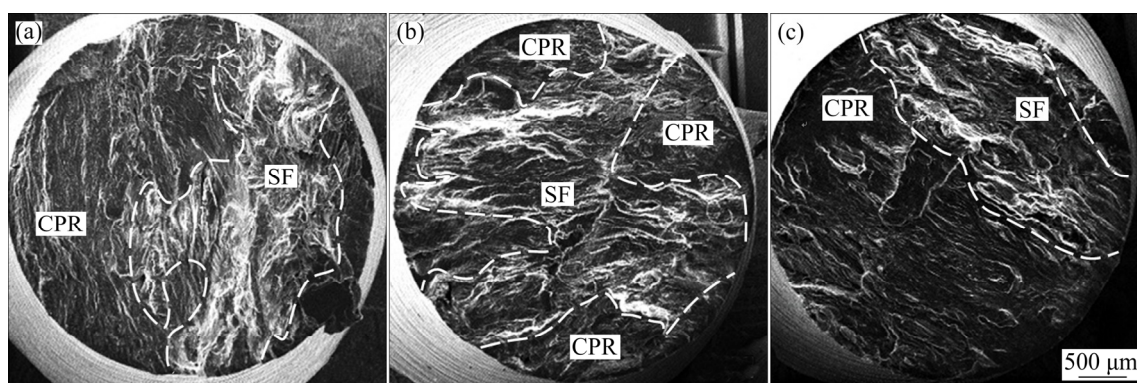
Macroscopic views of fatigue fracture surfaces of forged samples at stress amplitude of 30 MPa: (a) AZ31B-LAS; (b) Composite-LAS; (c) Composite-HAS
